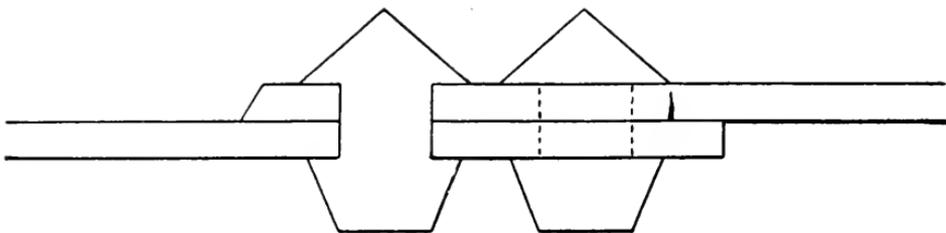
A LAP-JOINT CRACK UNDER THE OUTER EDGE OF THE RIVET HEADS.
